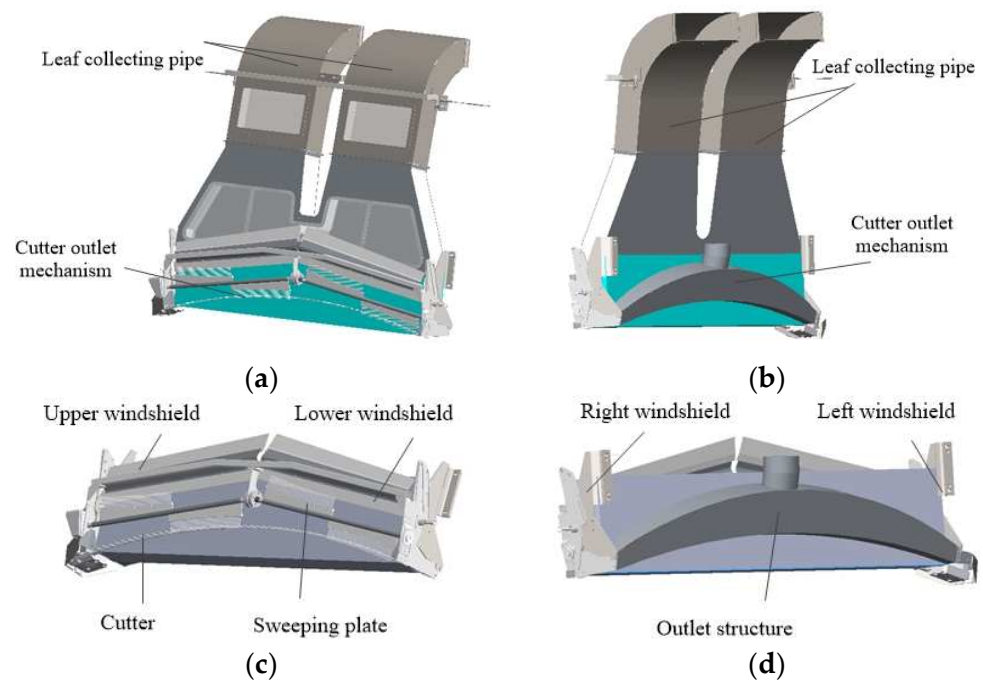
Three-dimensional drawing. (a) Cutting table of the tea machine (front). (b) Cutting table of the tea machine (rear). (c) Key components of tea plucking (front). (d) Key components of tea plucking (rear).
